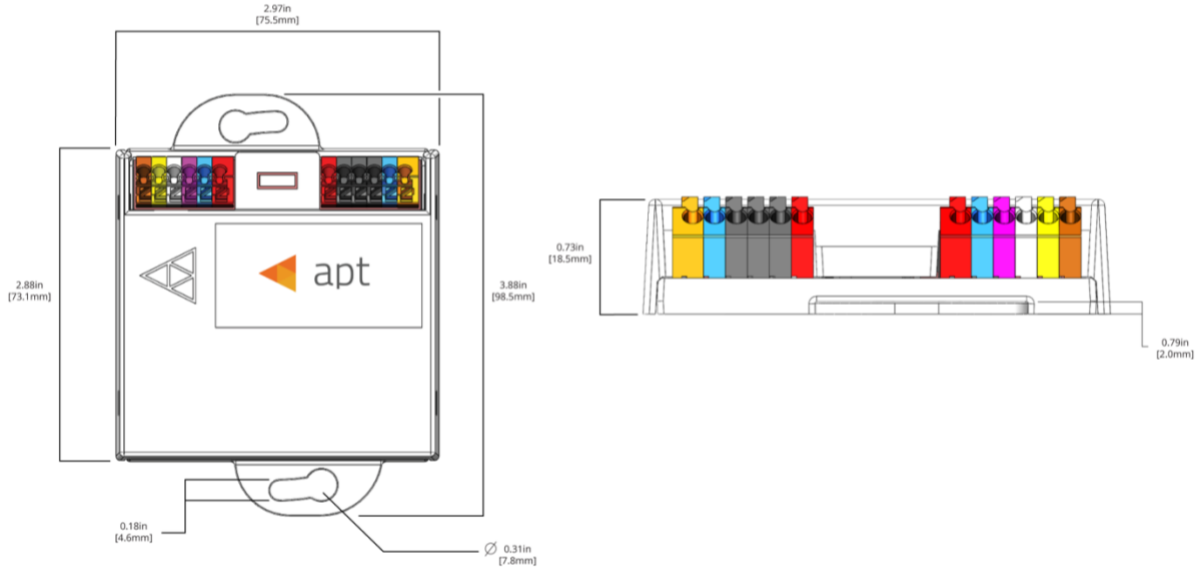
APT-CV4-Vx-SQ Mechanical Drawing
